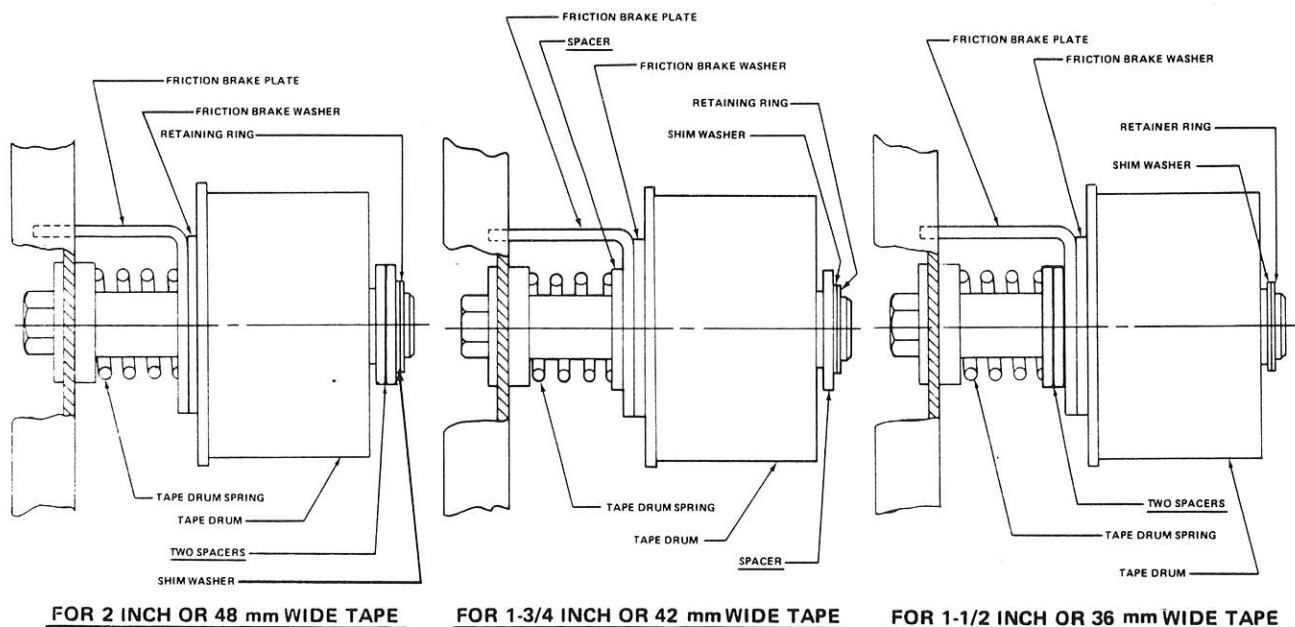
TAPE WIDTH ALIGNMENT - TOP VIEW
